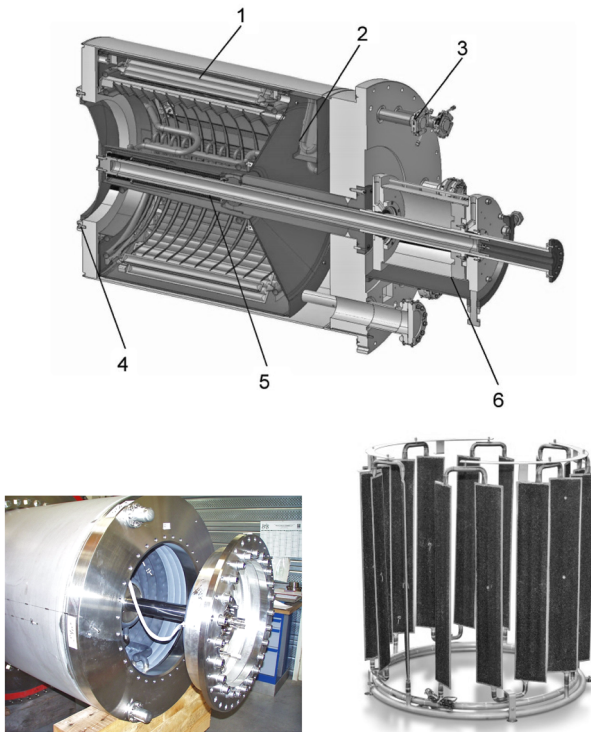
Design of the ITER cryopump. (1) Cryopanel (4.5 K); (2) thermal shields (80 K); (3) connections to the refrigeration supply (Johnston coupling); (4) inlet valve (DN 800); (5) valve stem; (6) pneumatic valve actuators. The photos show the valve (left) and the cryopanel arrangement (right) from a reduced-size prototype.
